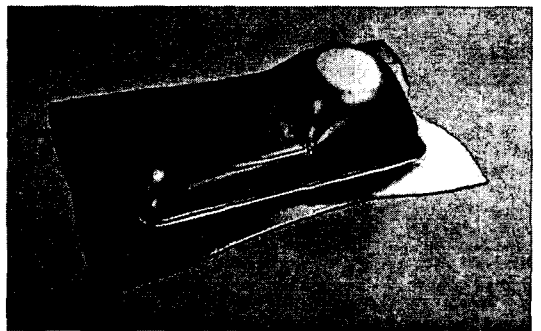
(b) Deformed parts of oil pan by hydroforming process of sheet metal pair at 200 bar
